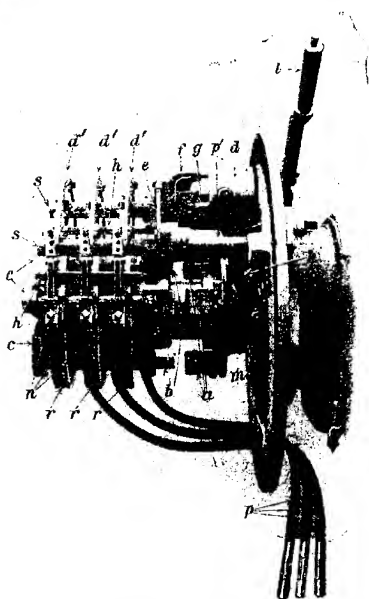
Short-Circuiting and Brush-Lifting Gear. (Bruce Peebles & Co.)
